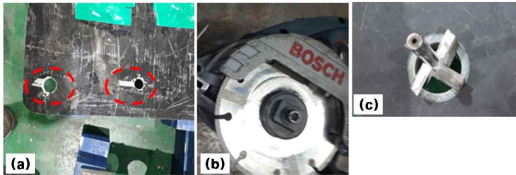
Delamination of the gel coat by tools: (a) Delamination of gel coat, (b) Straight cutting tools, (c) Hole cutting tools.
